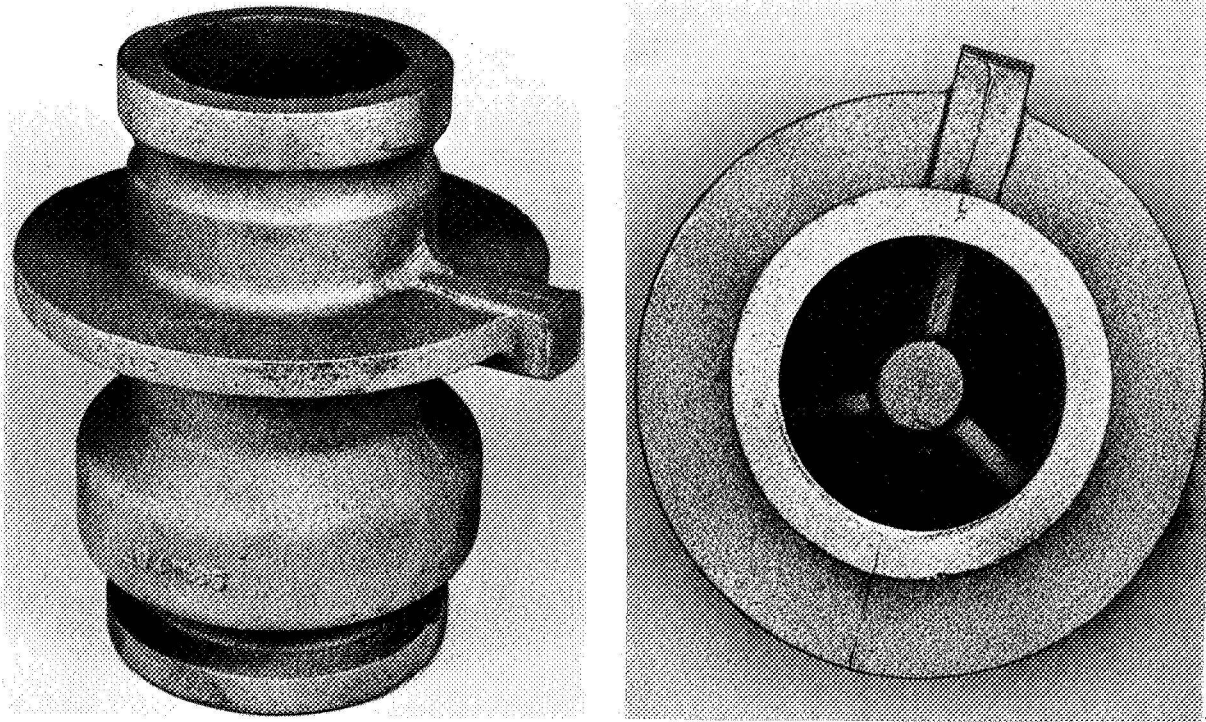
Oblique side view and top view of pump housing cast from M-45 alloy using conventional sand casting procedures (ref. 2).
